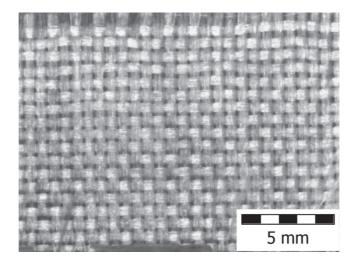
Typical fracture surface - cohesive type of failure of adhesive bond.
